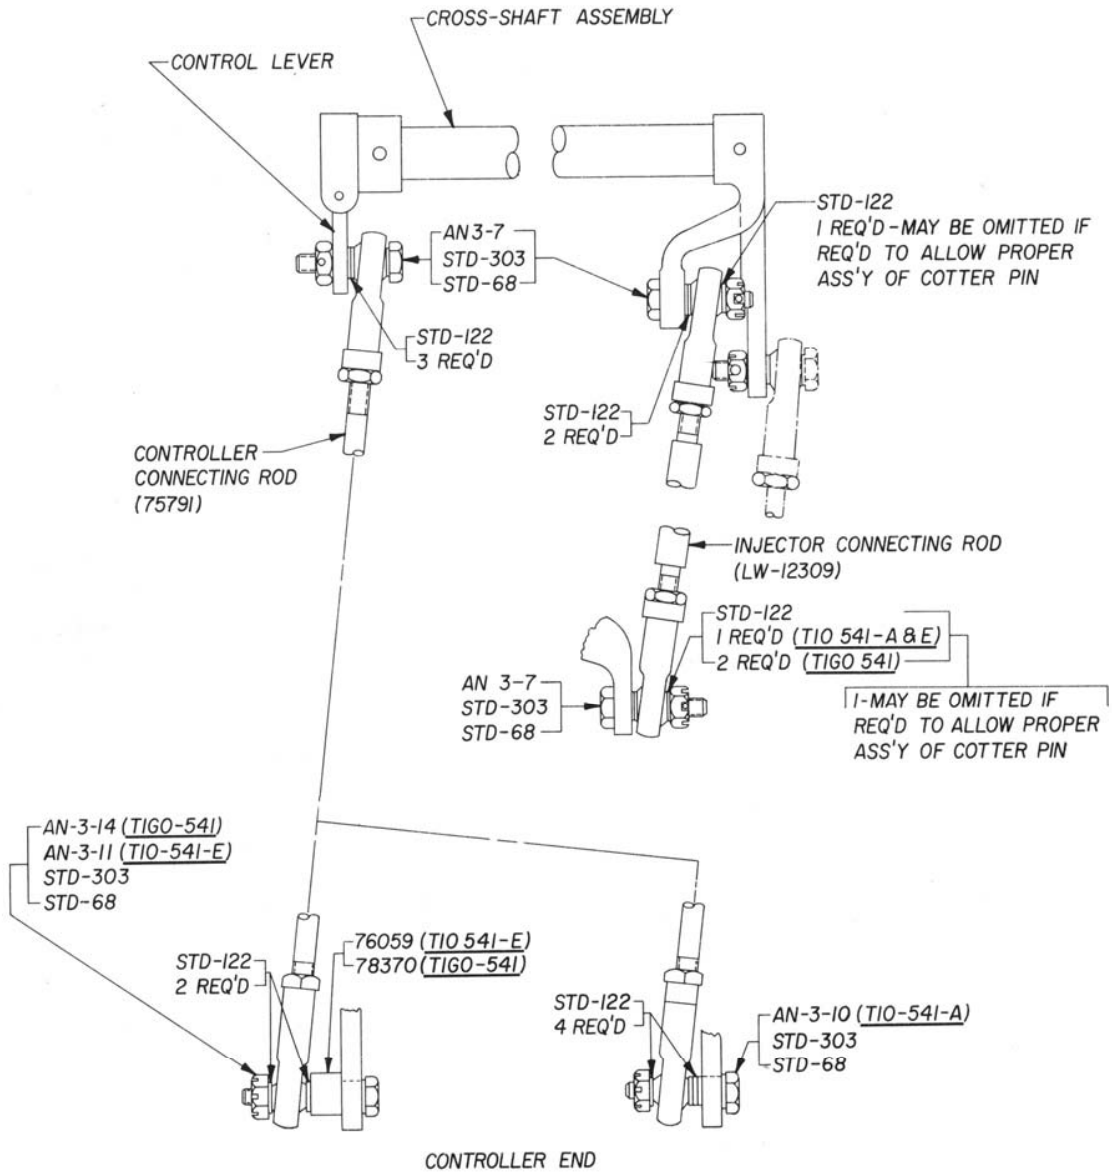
Fuel Injector and Controller Rods Attaching Parts
